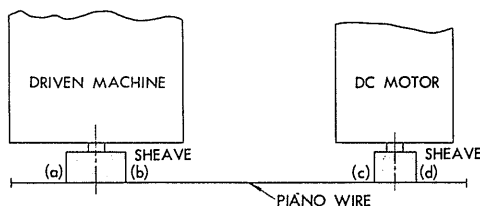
Checking Alignment of Two Sheaves with a Piano Wire
